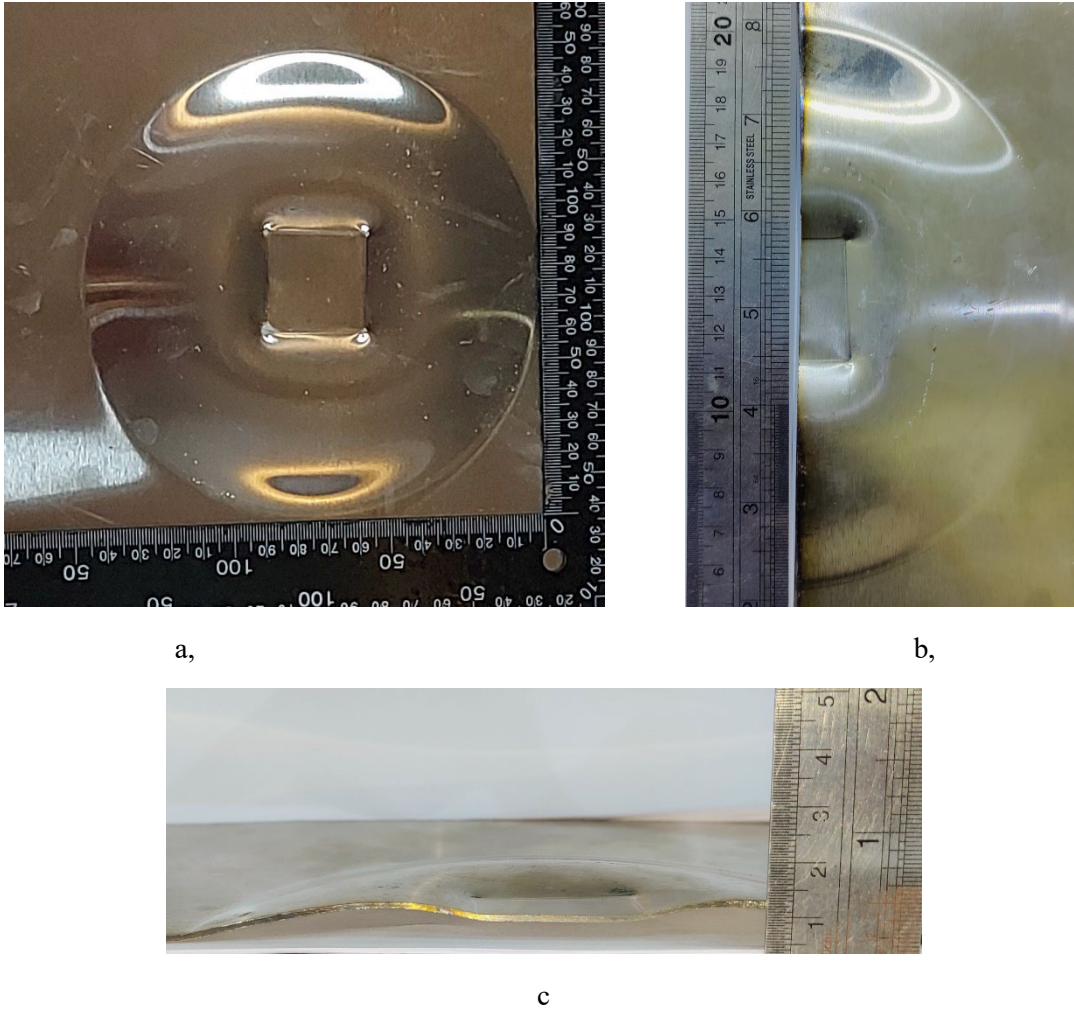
SS304 workpiece from various views a, Top view b, Half section top view c, Front view
